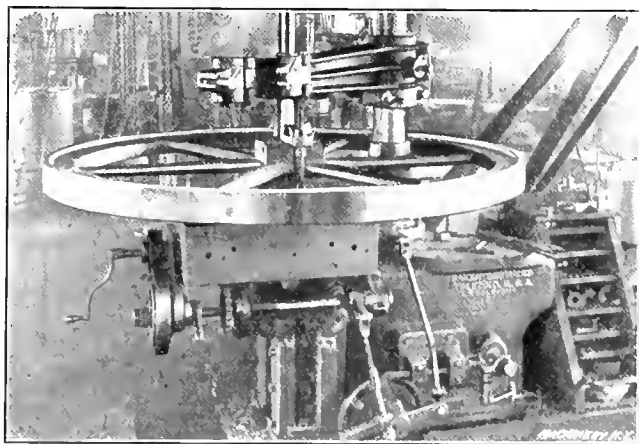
Cutting the Keyway in a Flywheel of the Split-hub Type
